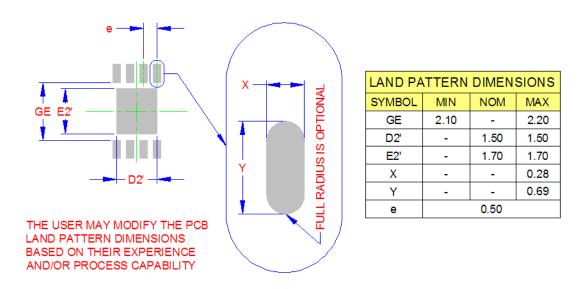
2mm x 3mm TDFN Package PCB Land Pattern
